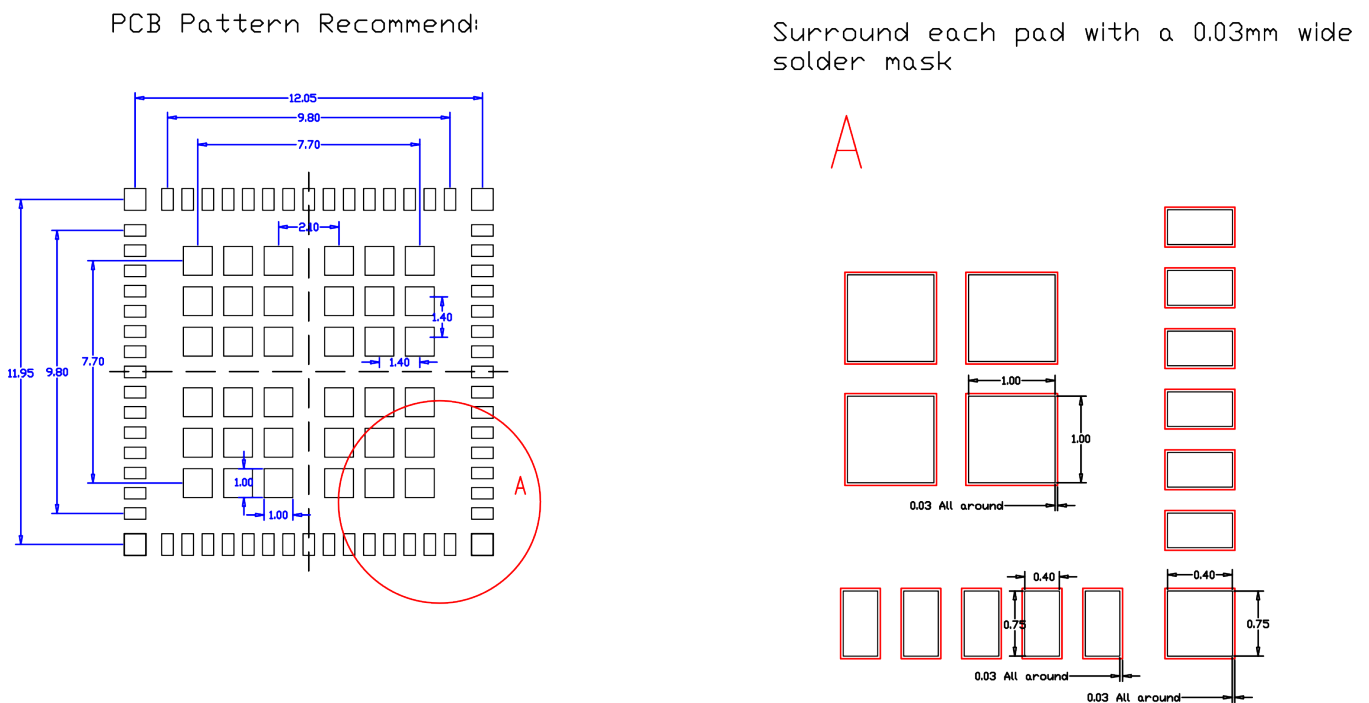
Outline of Recommended PCB Pattern for 100-Pin MOC Package
